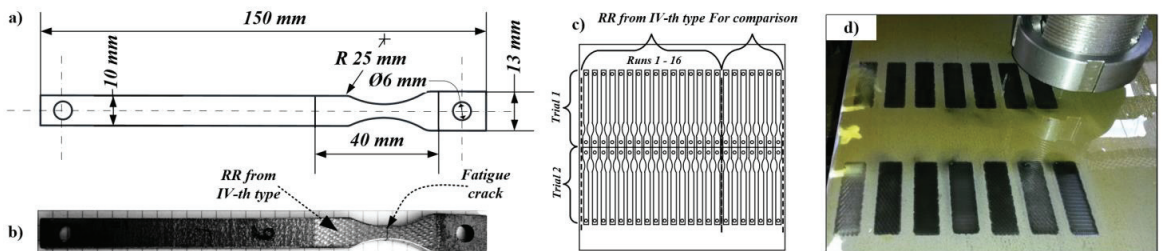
(a) Fatigue test specimens' shape and dimensions; (b) BB area with RR of the IV-th type; (c) arrangement of the specimens within the plates of AISI 304 and AISI 316L. (d) Physical BB-operation for obtaining the real RR from the IV-th type.
